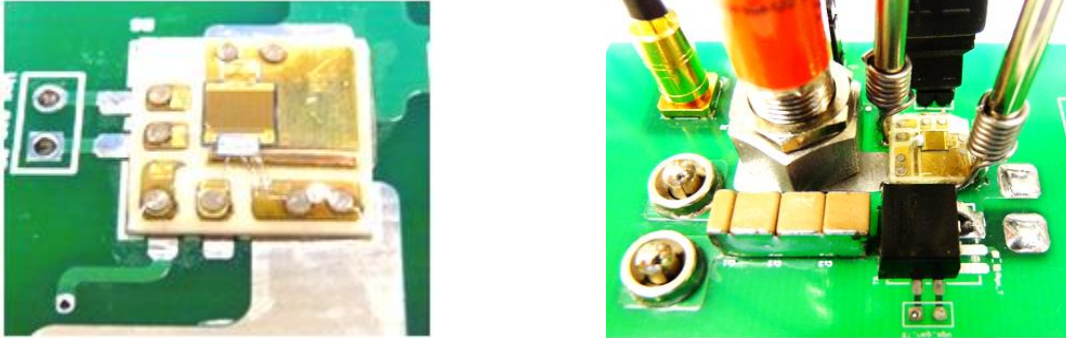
Packaged stack-die device mounted on the double-pulse tester board with transparent silicone elastomer glob-top encapsulation
